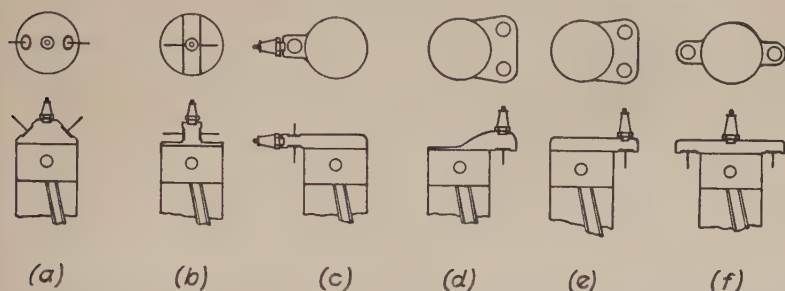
Types of cylinder heads showing valve and spark plug arrangement. Top views of (d), (e) and (f) are with cylinder head removed.
